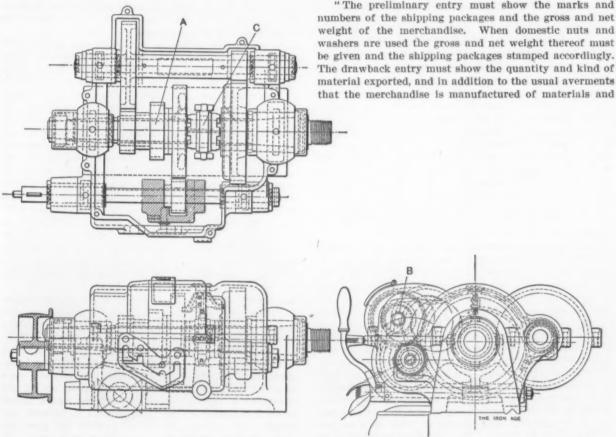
Details of the Hendey All Geared Lathe Head.
